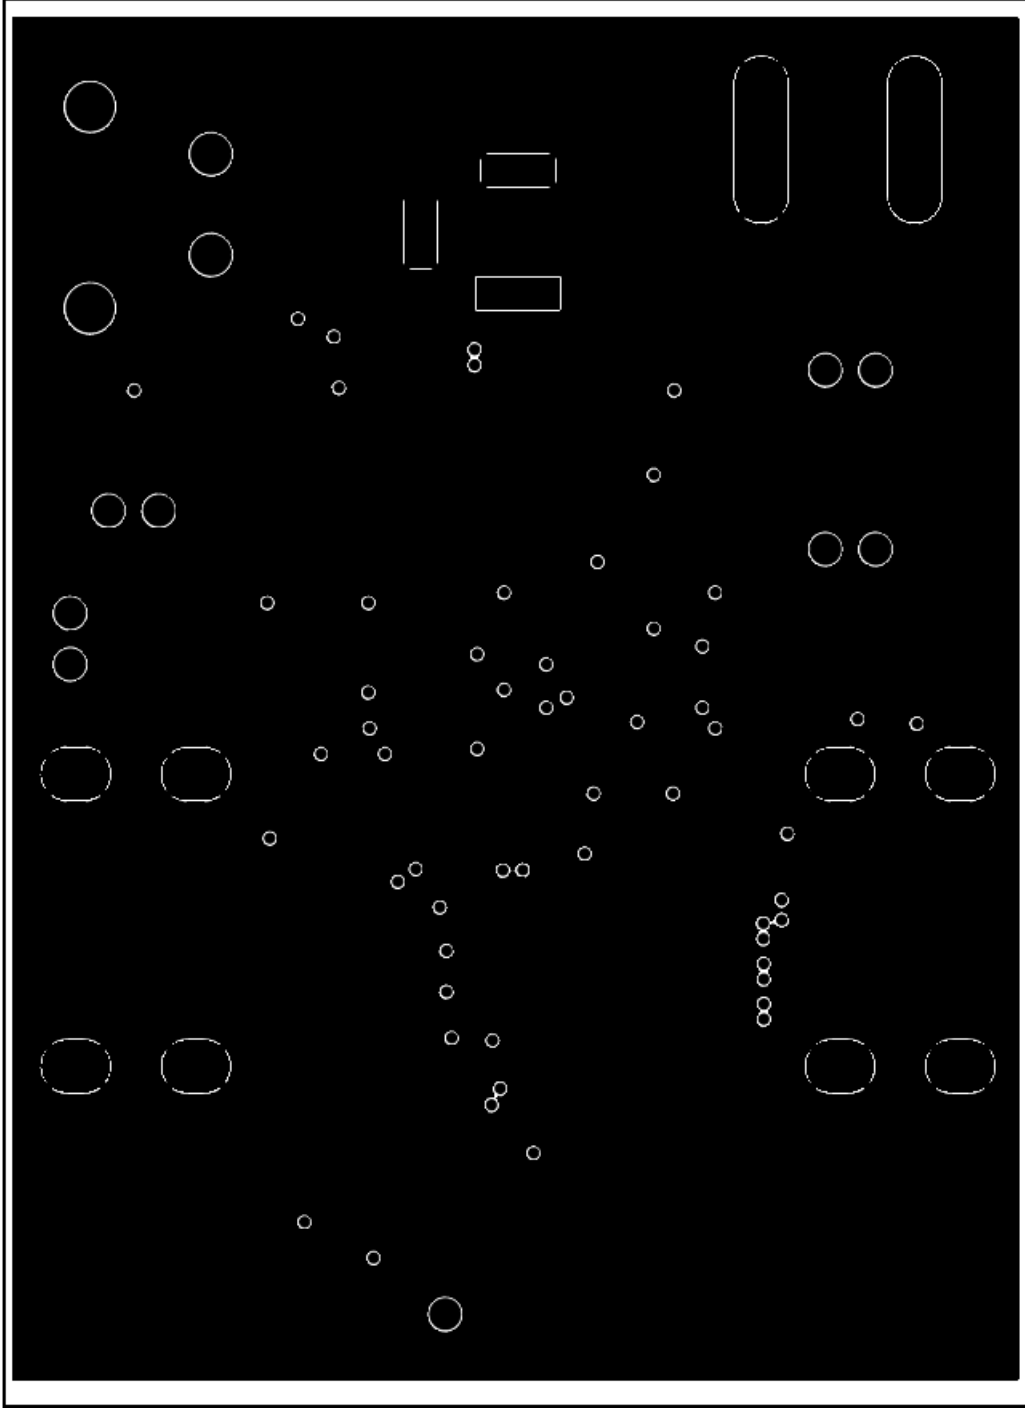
MAX3815A EV Kit PCB Layout—Ground Plane
